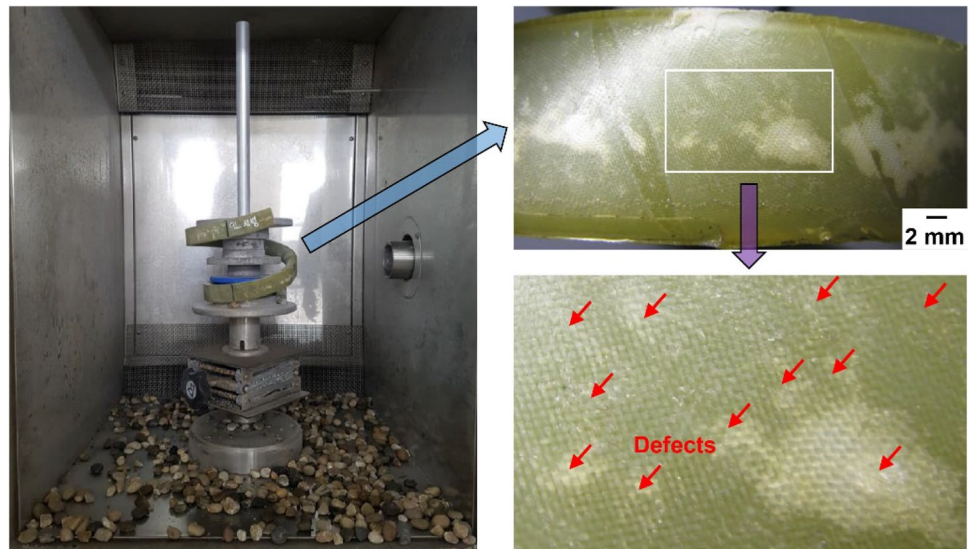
Photographs of damaged parts on the surface of the GBRP composite coil spring after chipping test
